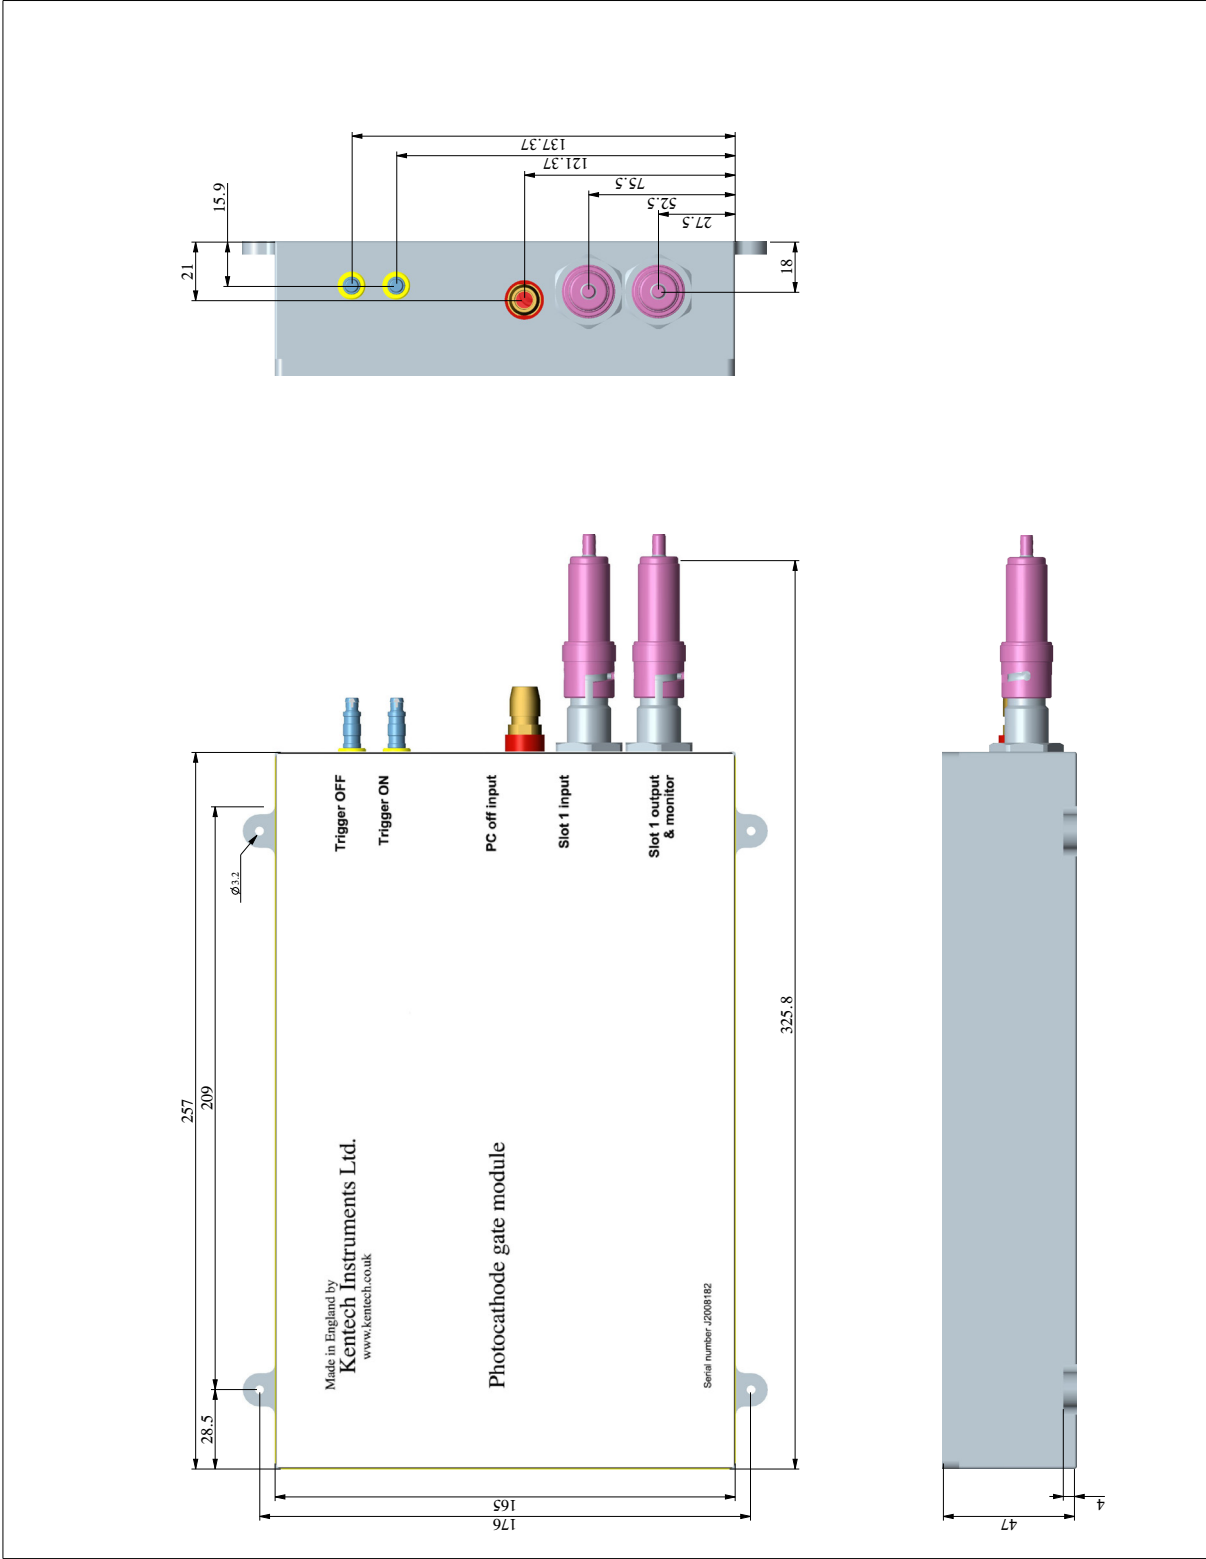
Dimensions and mount details for the Photocathode gate pulser
